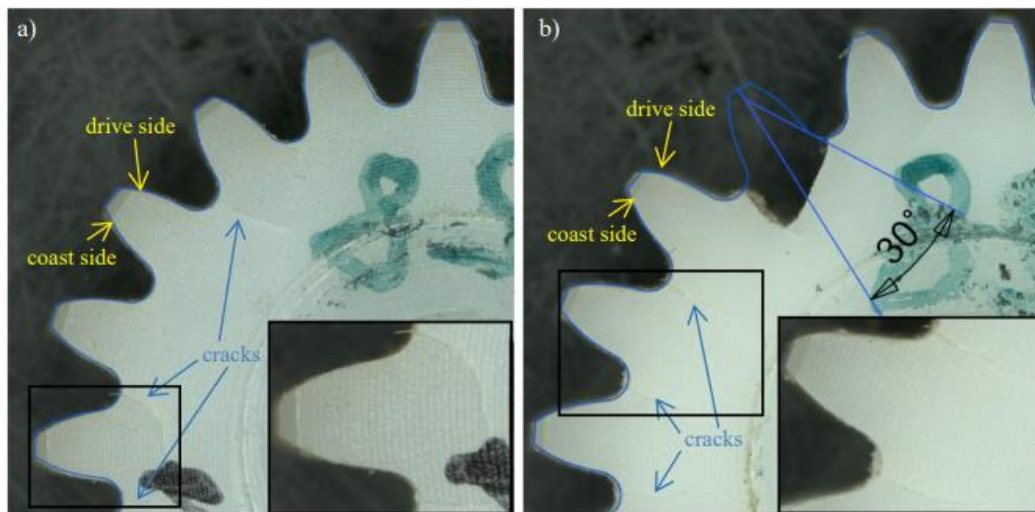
30 Tooth Gear-Meshing (after, [106])
